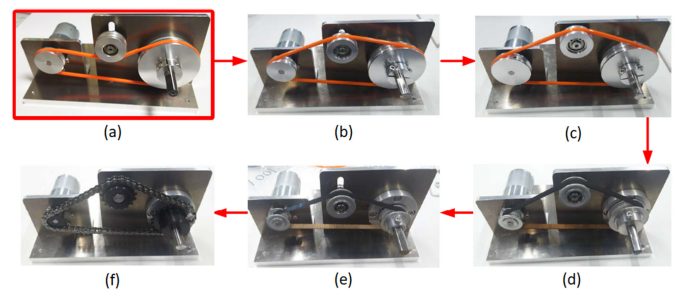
Belt drive assembly (a) and increasing design variants (b)–(f) from WRS 2018.
